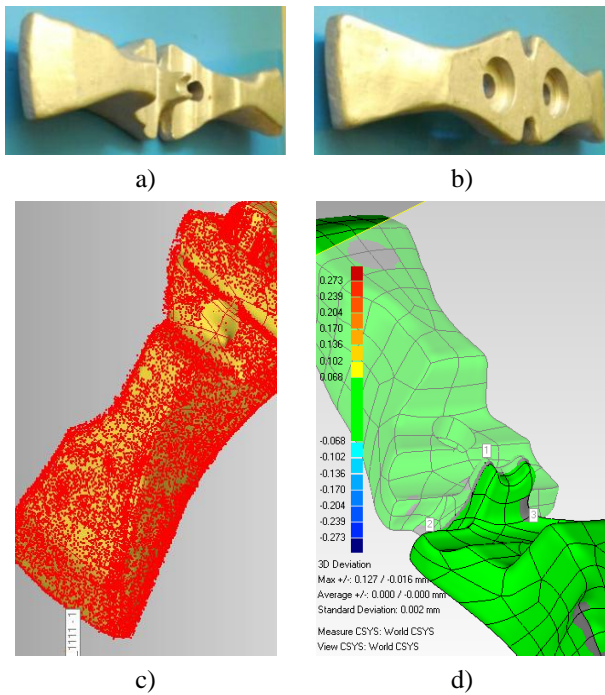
Casted and postprocessed cross member of scraper conveyor (a) (b), overlapped CAD model and scanned clouds of points (c), results of CAD inspection (d)
